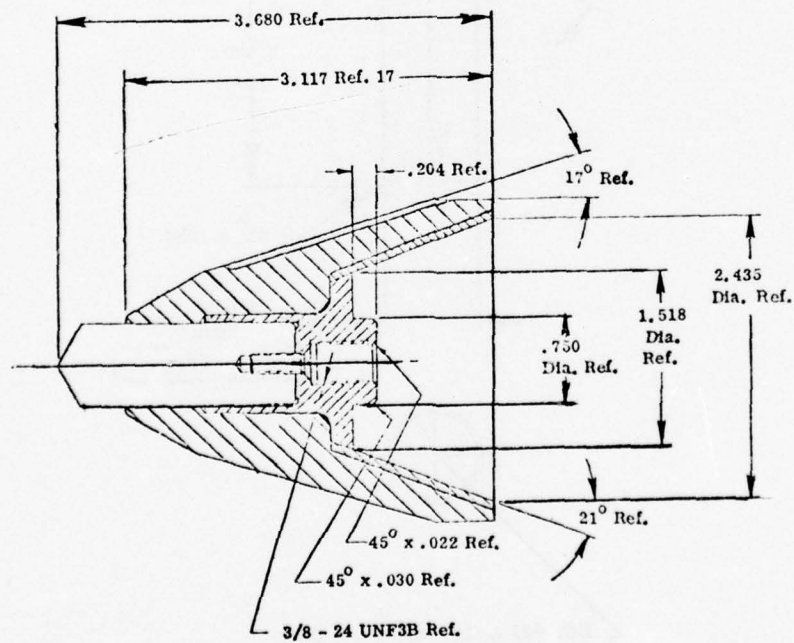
Rotating Specimen Assembly (0.721-Inch Diameter)
